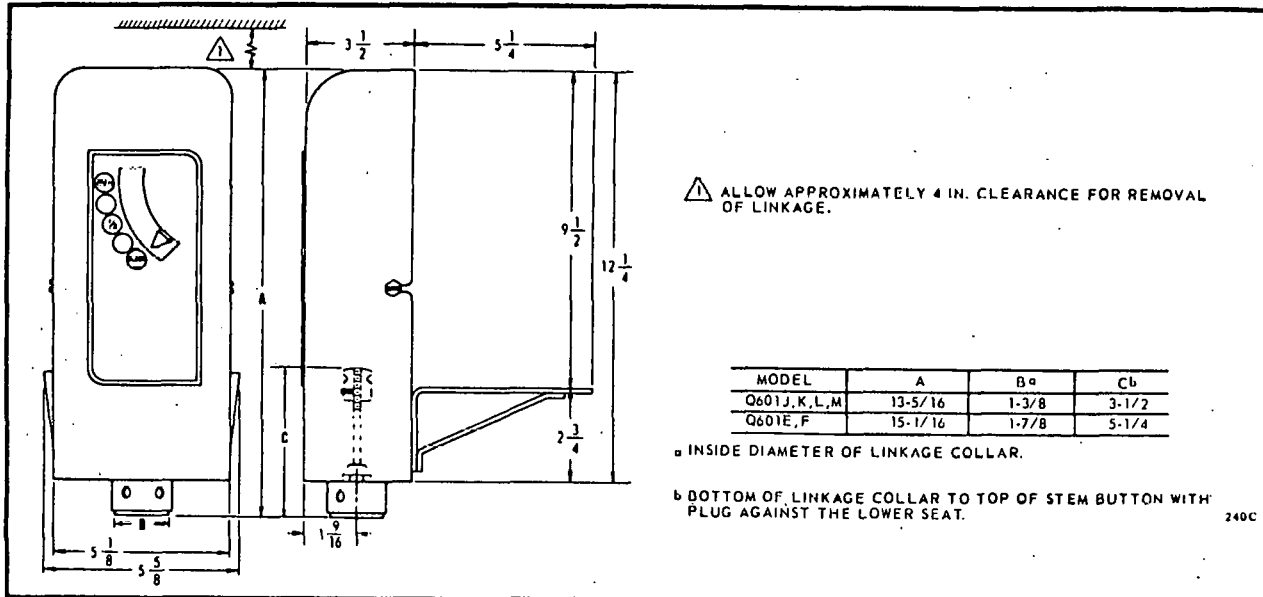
Q601 LINKAGES INSTALLATION WITH DIMENSIONS IN INCHES.
